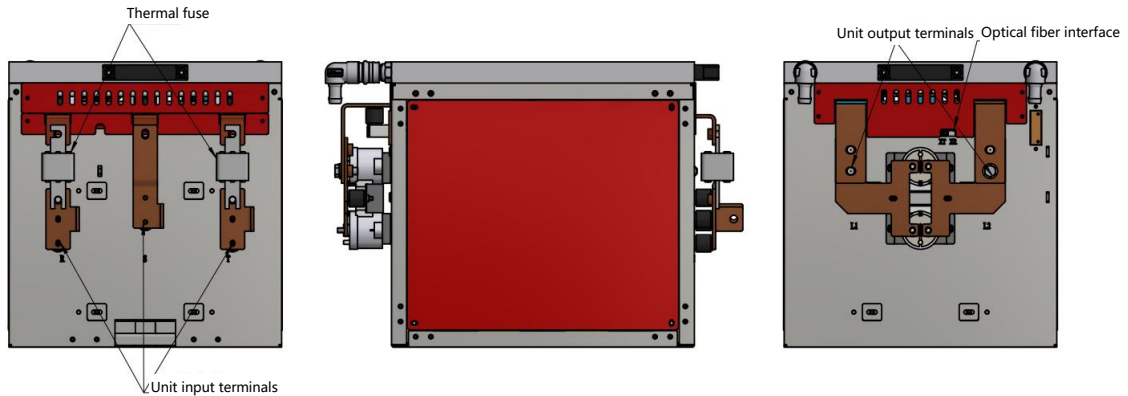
Outline Drawing of Water-cooled Power Unit
